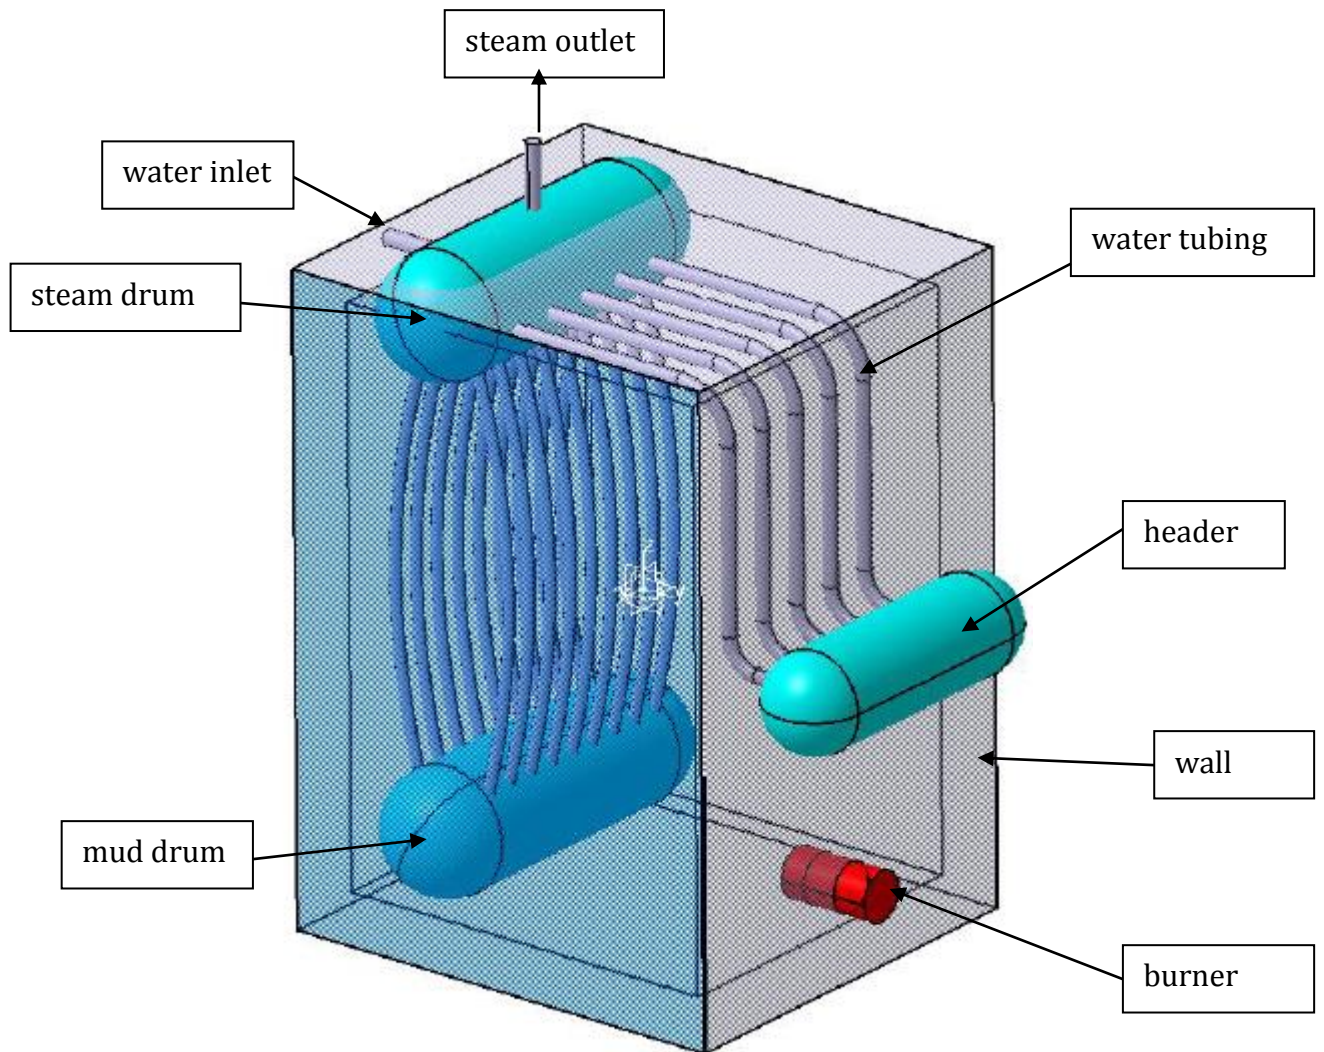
Design of Combustion Chamber of boiler for simulation
